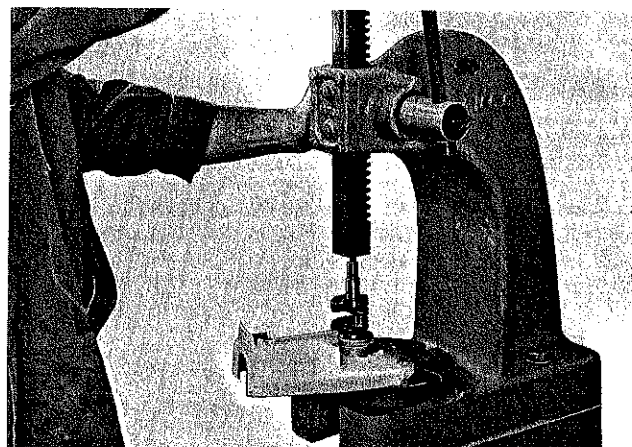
Pressing the crankshaft (with ball bearing) into the crankcase cover.
